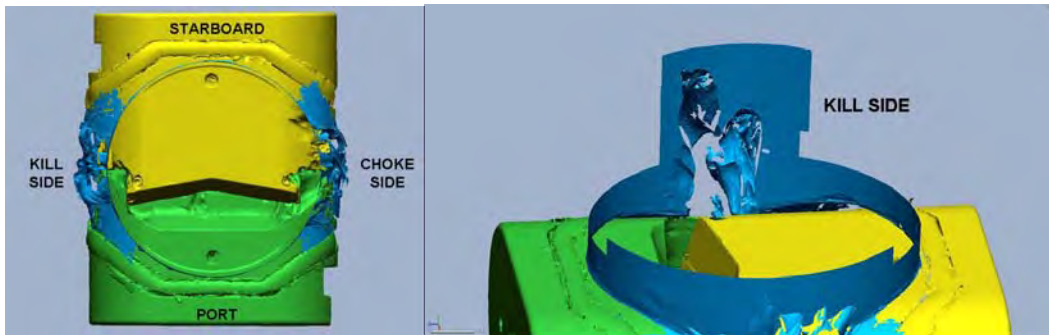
Laser Scan Showing Overhead View of BSR and Wellbore
